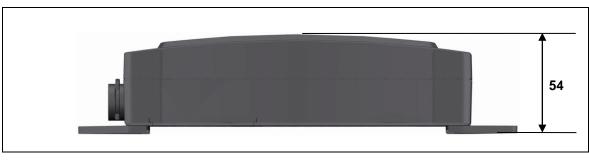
Dimensions of the PD13 POWER SUPPLY, side view (in mm)
